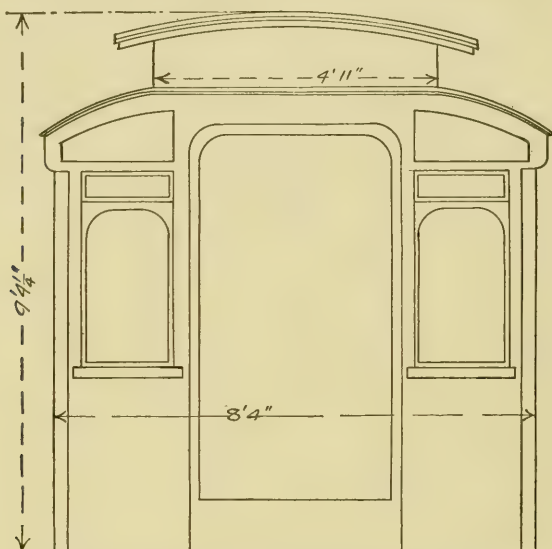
Cross Section of Car Body of "Louisiana." This Sketch Also Shows the General Dimensions of the "Flat" Movable Vestibule.
